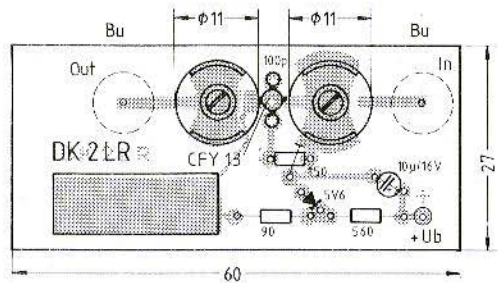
PCB and component layout for the amplifier of Fig. 1
